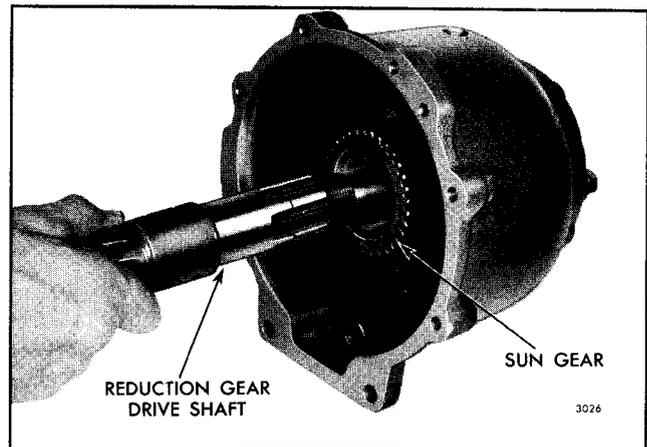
Installing Reduction Gear Drive Shaft in Sun Gear and Bearing (1.5:1 Ratio)
